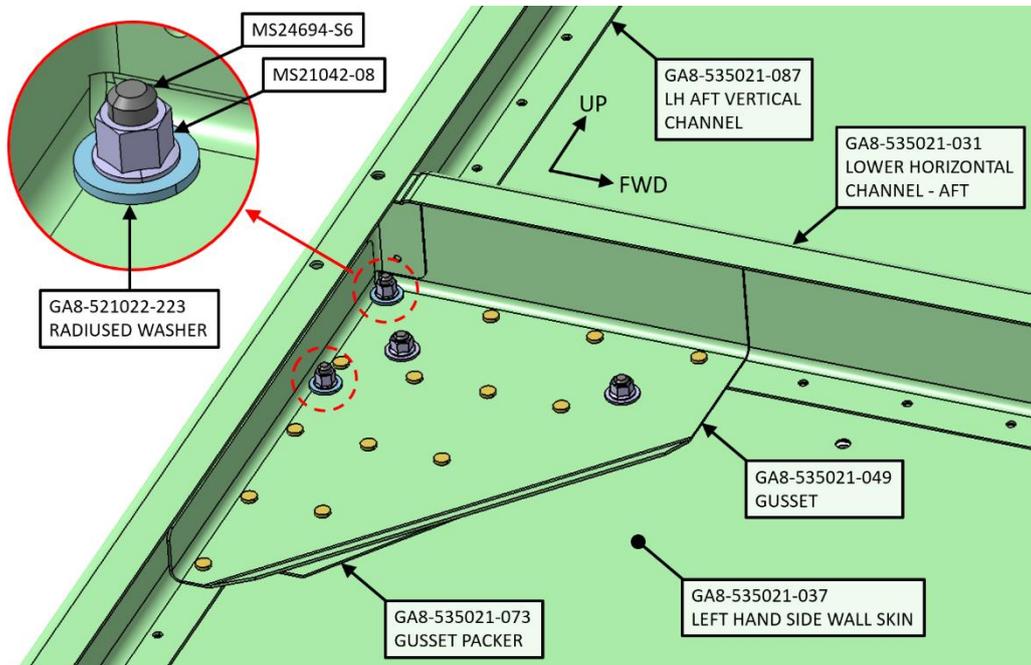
Installation of the Centre Rail Aft Stop (P/N: GA8-521022-221) component. View looking at the interior structure of the aircraft's port side fuselage wall.
